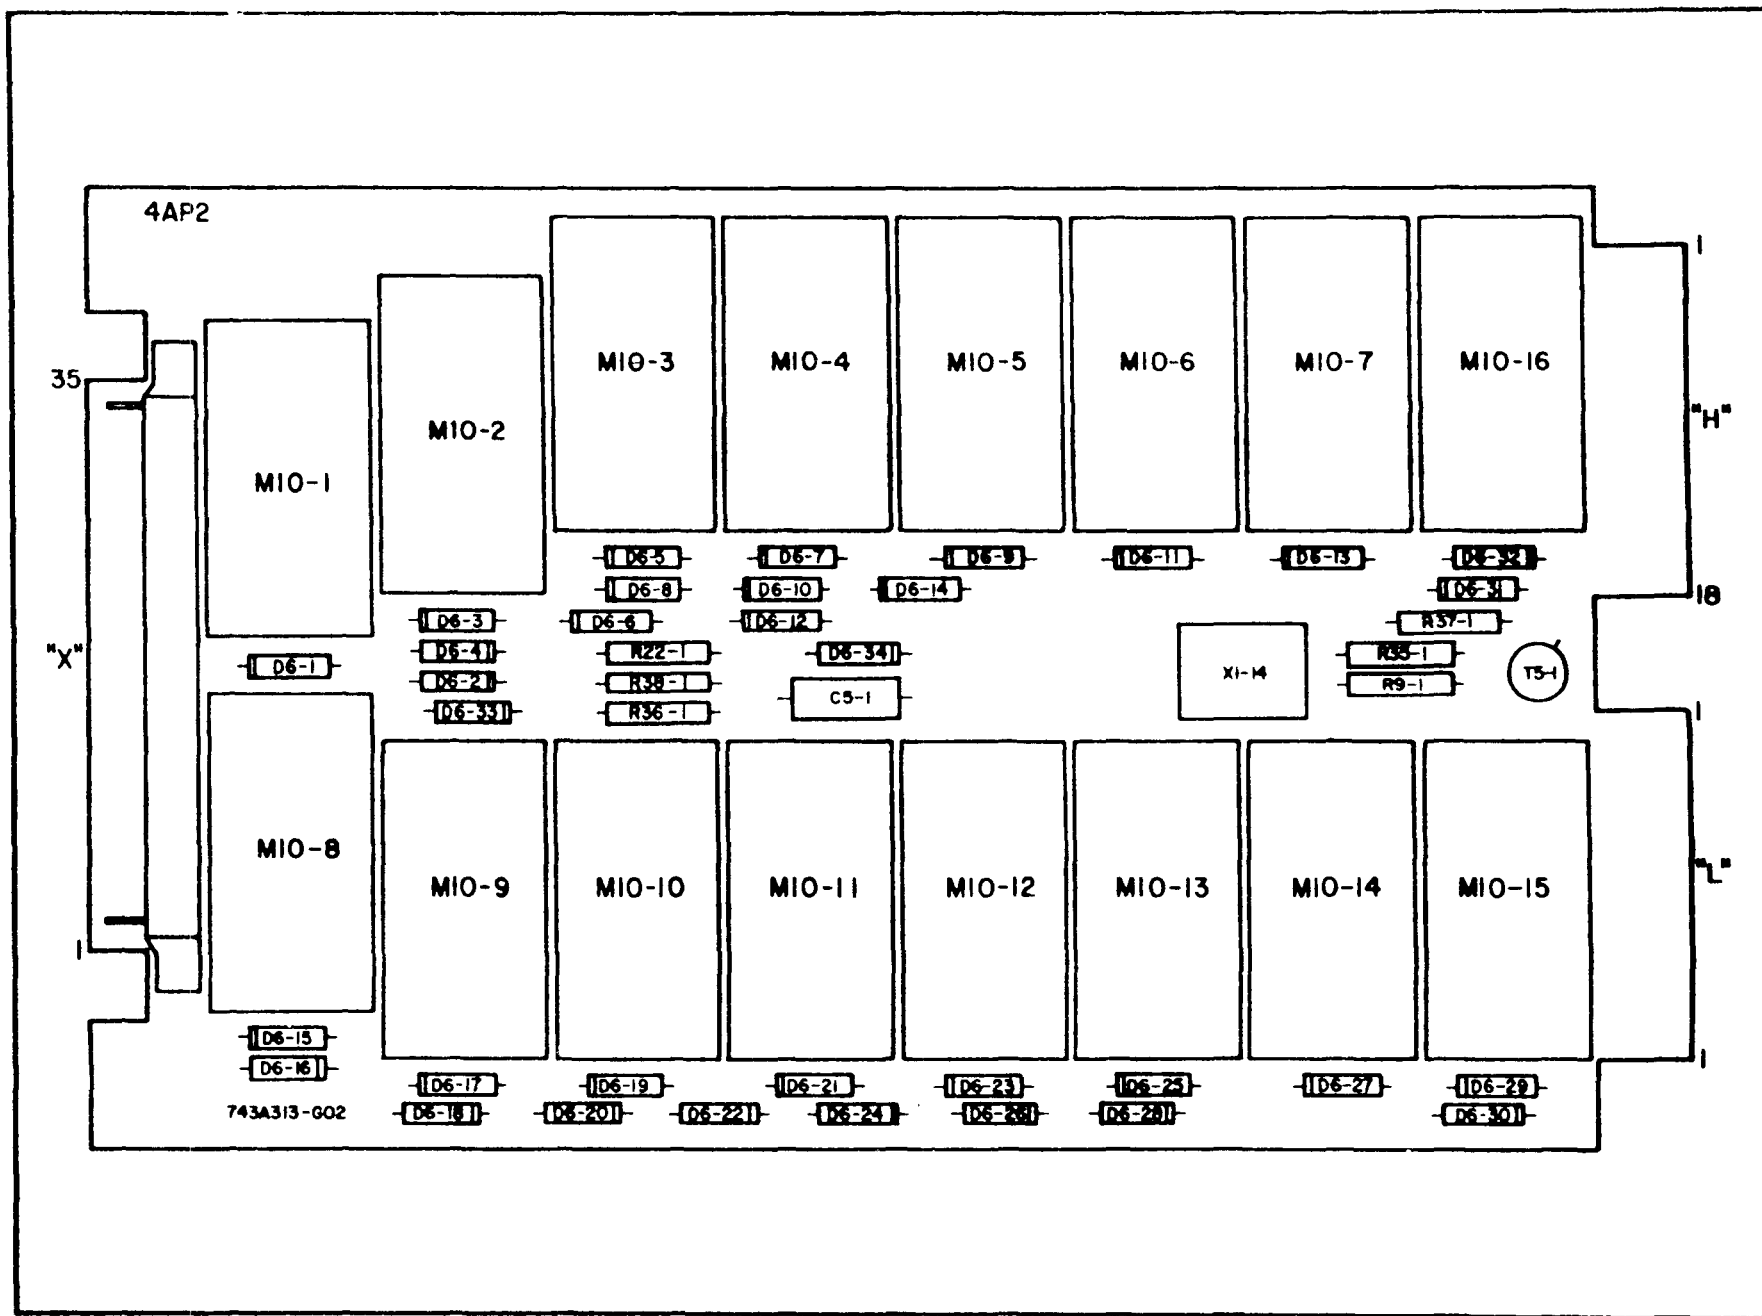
4AP2 ASSEMBLY (REF. DWG. 743A313, SUB 2)
